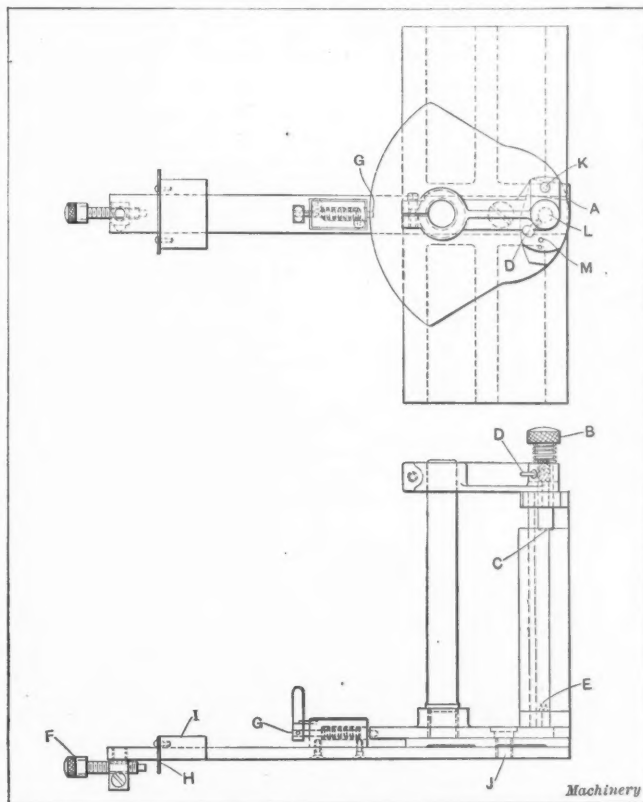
Gear Tooth Grinding Fixture for Use on Besly Patternmakers' Disk Grinder
